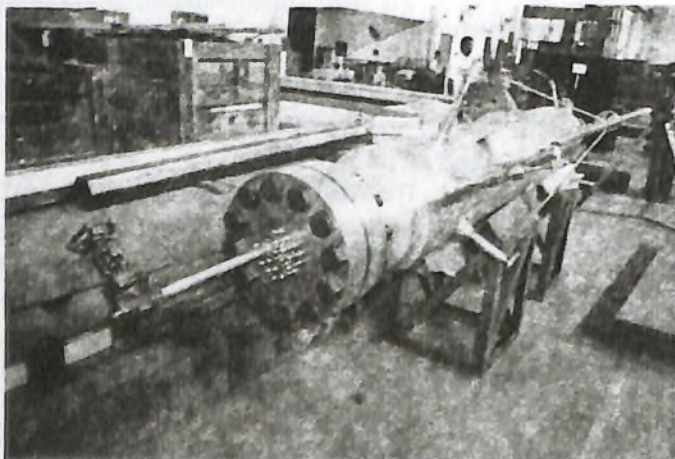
Surge tank ready for Hydraulic Test after salvage
